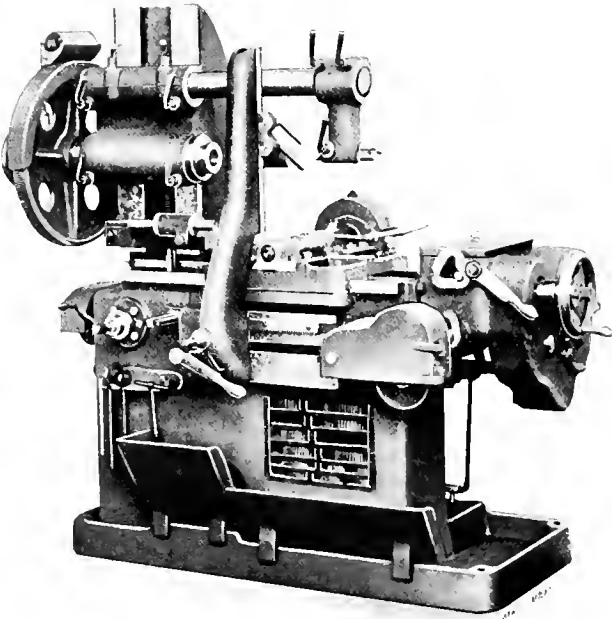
A New Cincinnati Gear-cutting Machine, of a size well adapted to Automobile Work
